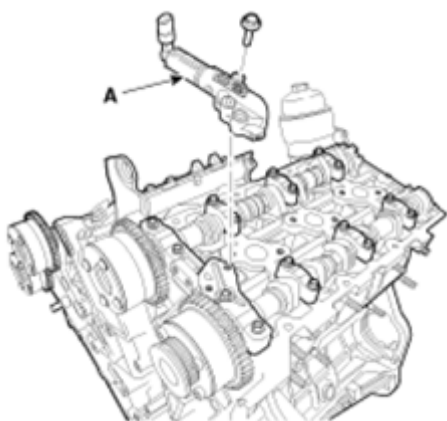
Identifying LH/RH Exhaust Camshaft OCV
